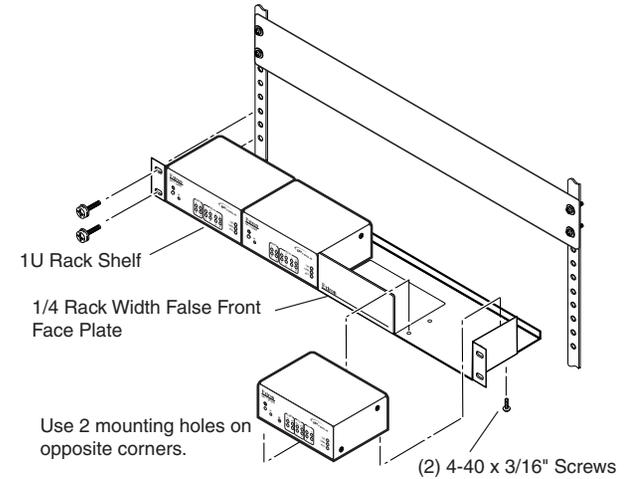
Rack mounting the interface on the VersaTools shelf (SFI244 model shown)
